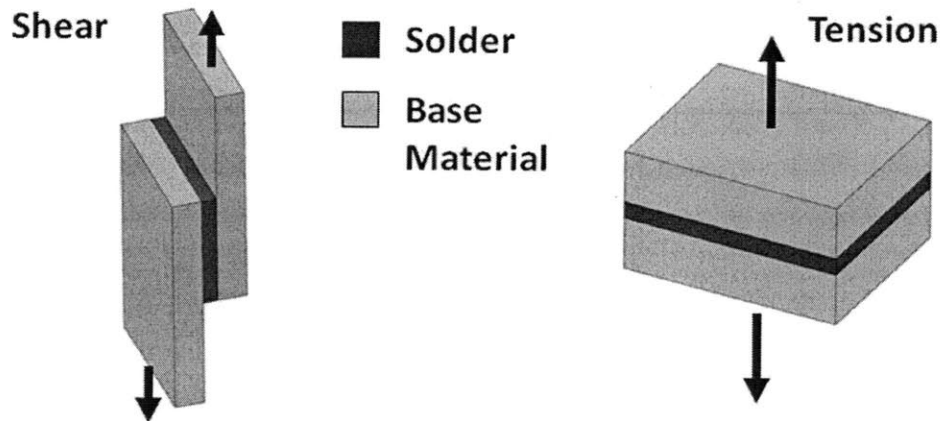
Generalized Shear and Tension Solder Joint Geometries.
